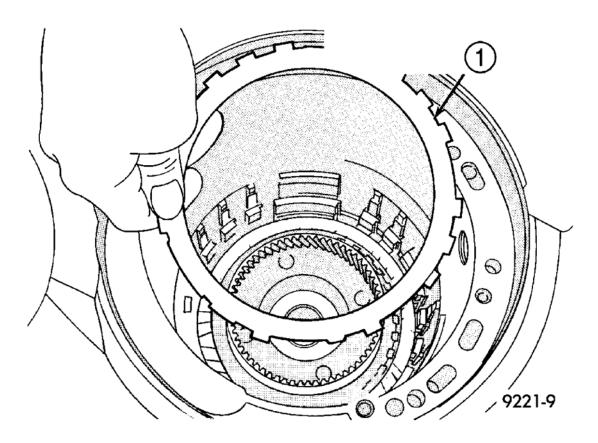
Installing Low/Reverse Reaction Plate With Flat Side Up Courtesy of CHRYSLER LLC
